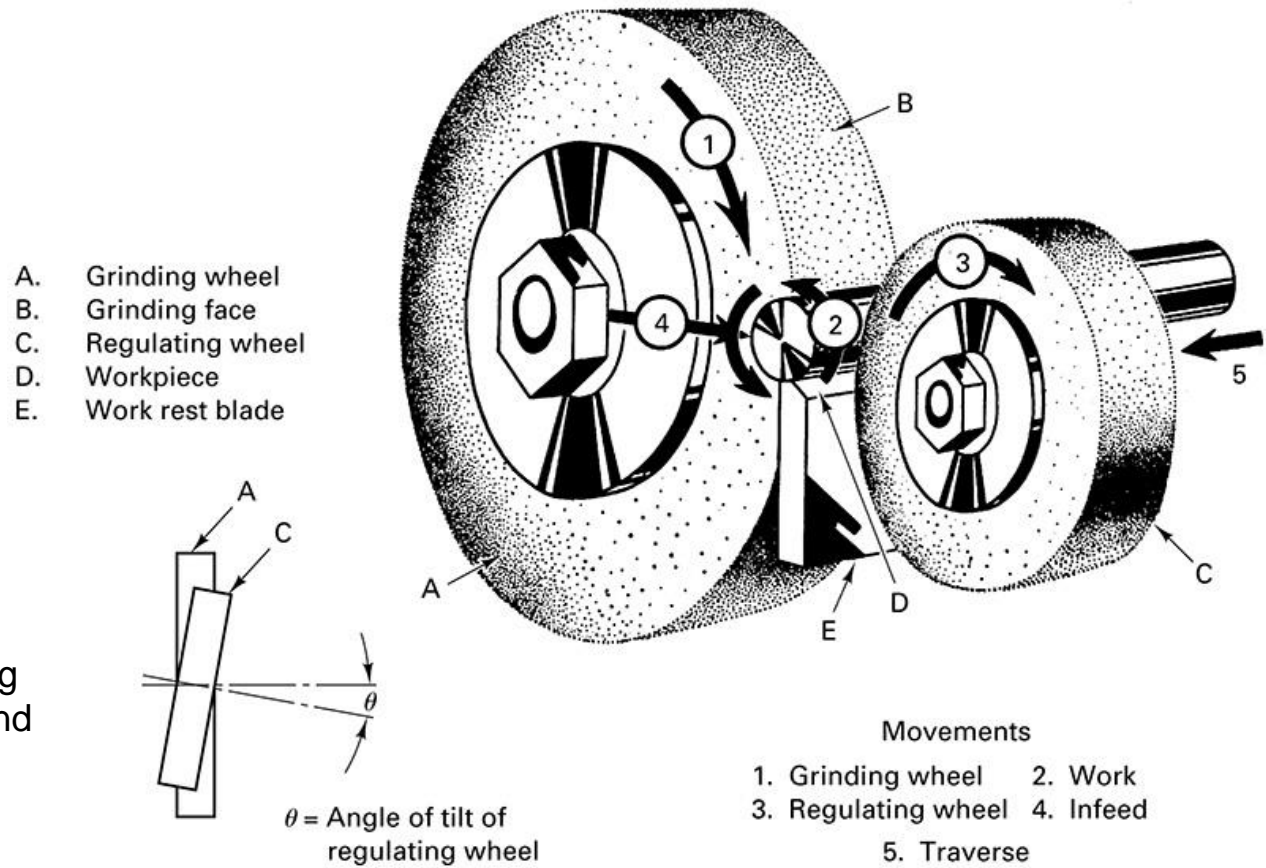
Centerless grinding showing the relationship among the grinding wheel, the regulating wheel, and the workpiece in centerless method. (Courtesy of Carborundum Company.)
